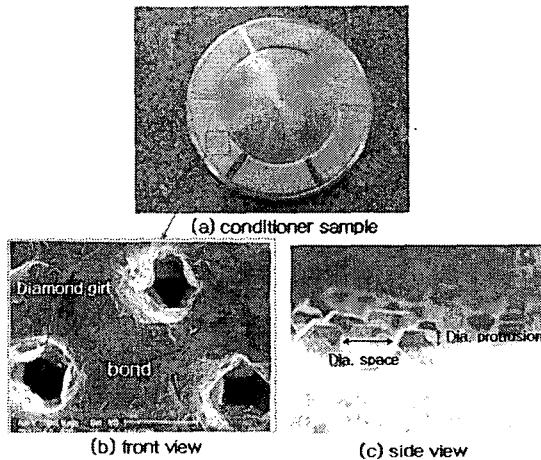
Photos of (a) vacuum braze CMP pad conditioner, (b) its SEM-image of front view and (c) side view
